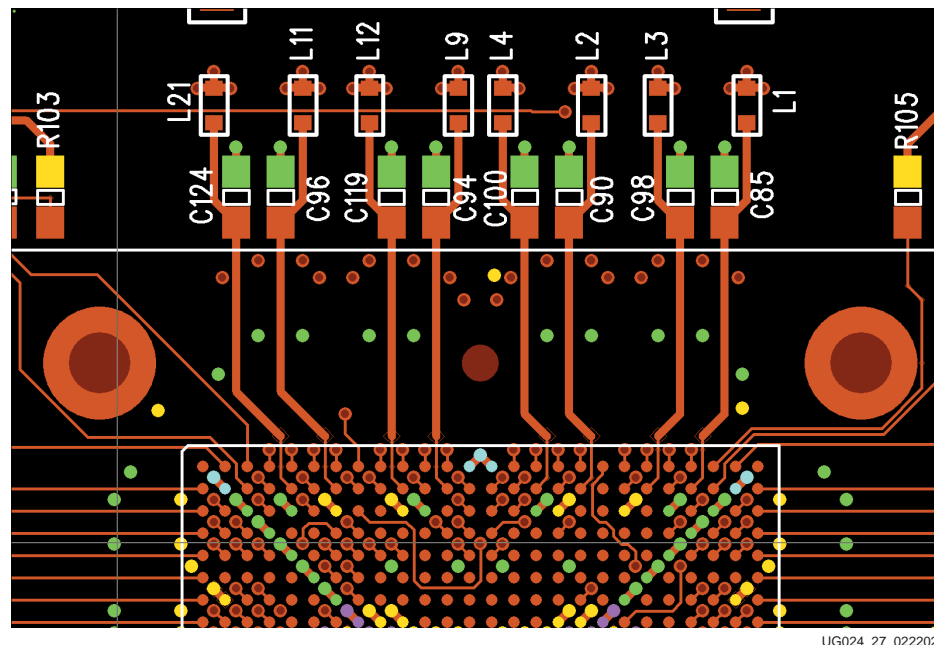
Example Power Filtering PCB Layout for Four MGTS, Top Layer
